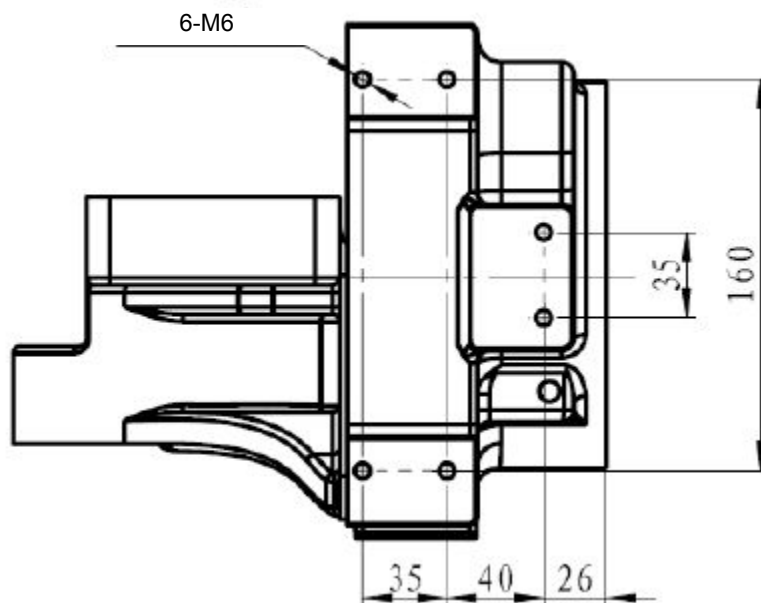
Forearm Auxiliary Mounting Hole Dimensions of SR20/ SR18L8
